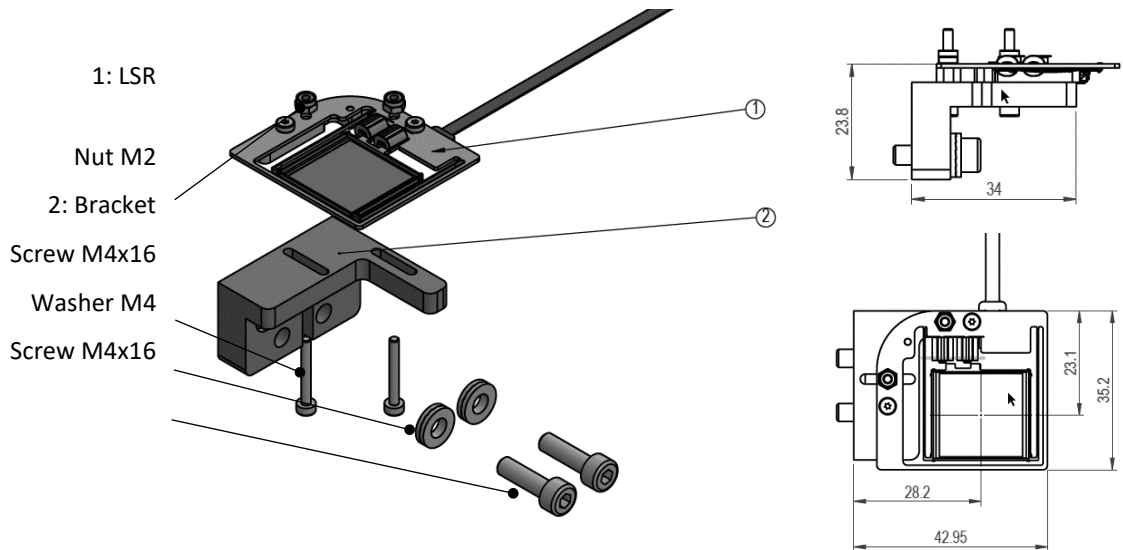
Mechanical layout of the LSR-5-8.5S-VIS-1D (with bracket) assembly. The LSR-5-8.5S-VIS-1D is mounted onto the bracket which in turn can be mounted into an existing setup. The weight of the bracket is 43 g.
